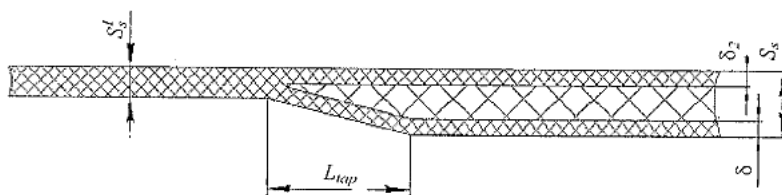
Single-skin to sandwich transition of the deck plating
